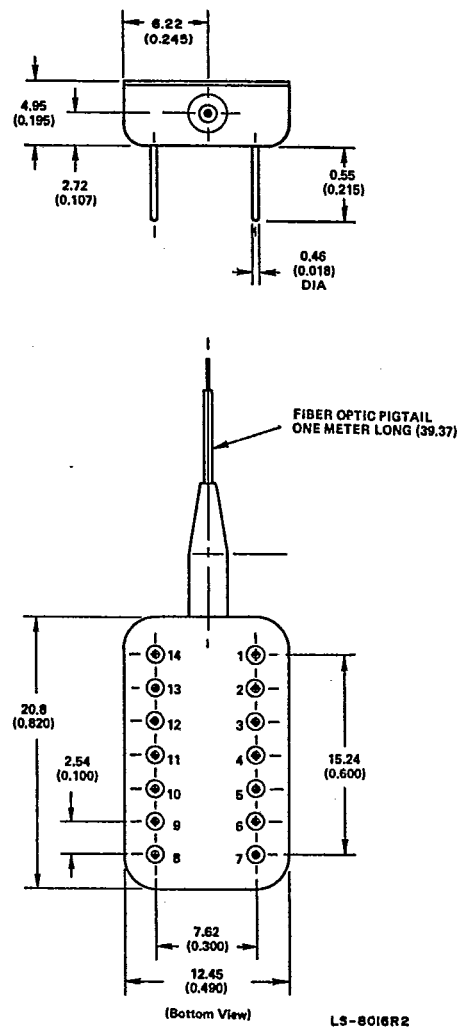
Dimensional Outline - C30998-XXXQC-YY
